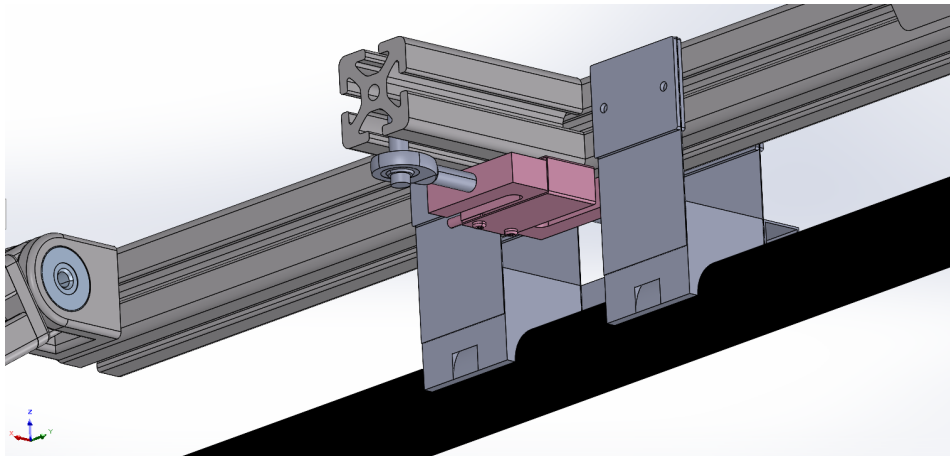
Bottom view of the flexure assembly at the handlebar connection point. The black tube represents the handlebar, the two outer components are the flexure devices, and the red component located between them is the loadcell.
